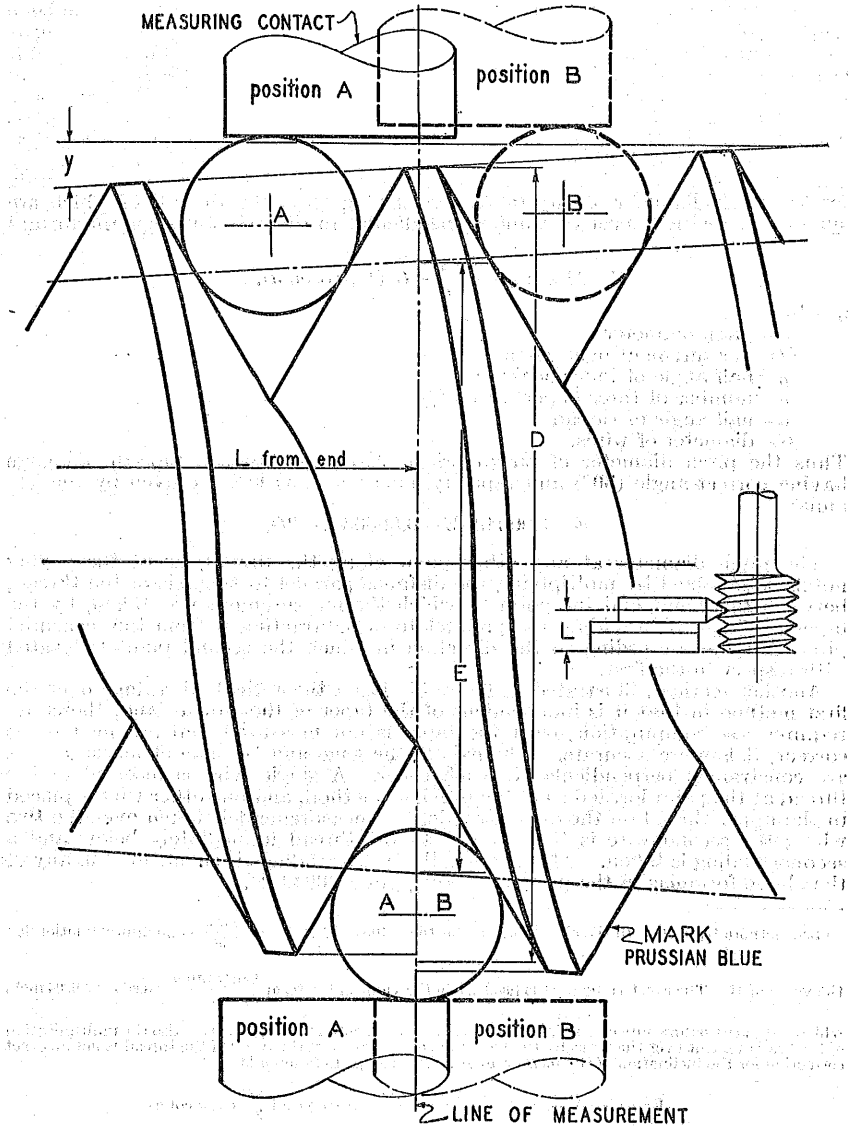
Measurement of pitch diameter of taper thread gages by the 2-wire method.
